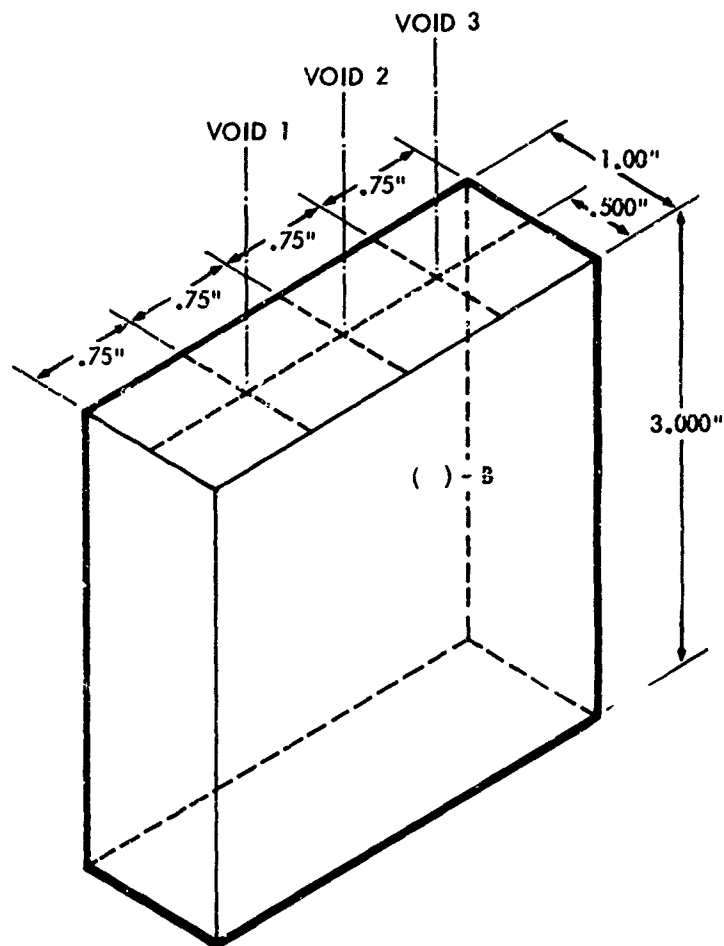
Location of Voids in Single Bond - Single Axis Joints
